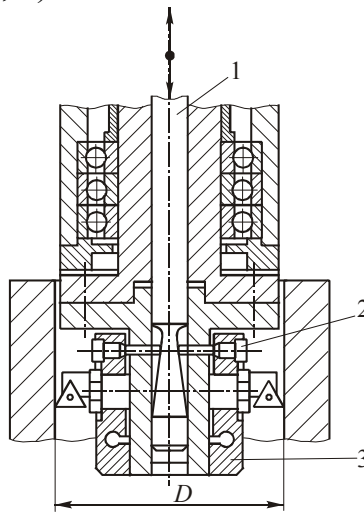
Design of a boring bar with automatic adjustment to the size
